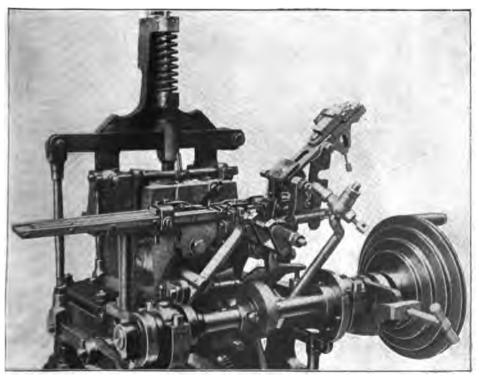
Davis pivotal typecaster ; setting up type in line.
